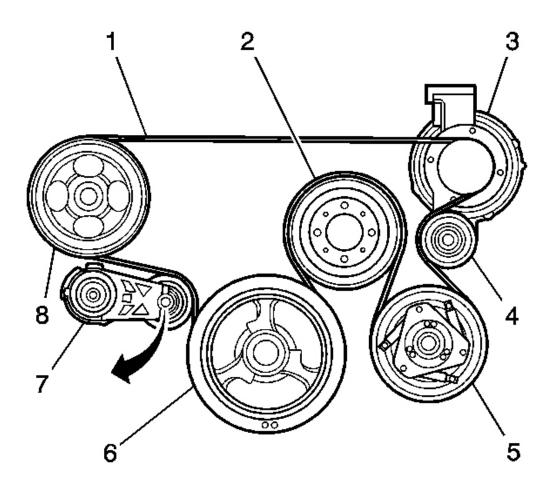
View Of Drive Belt & Pulleys (With A/C)
